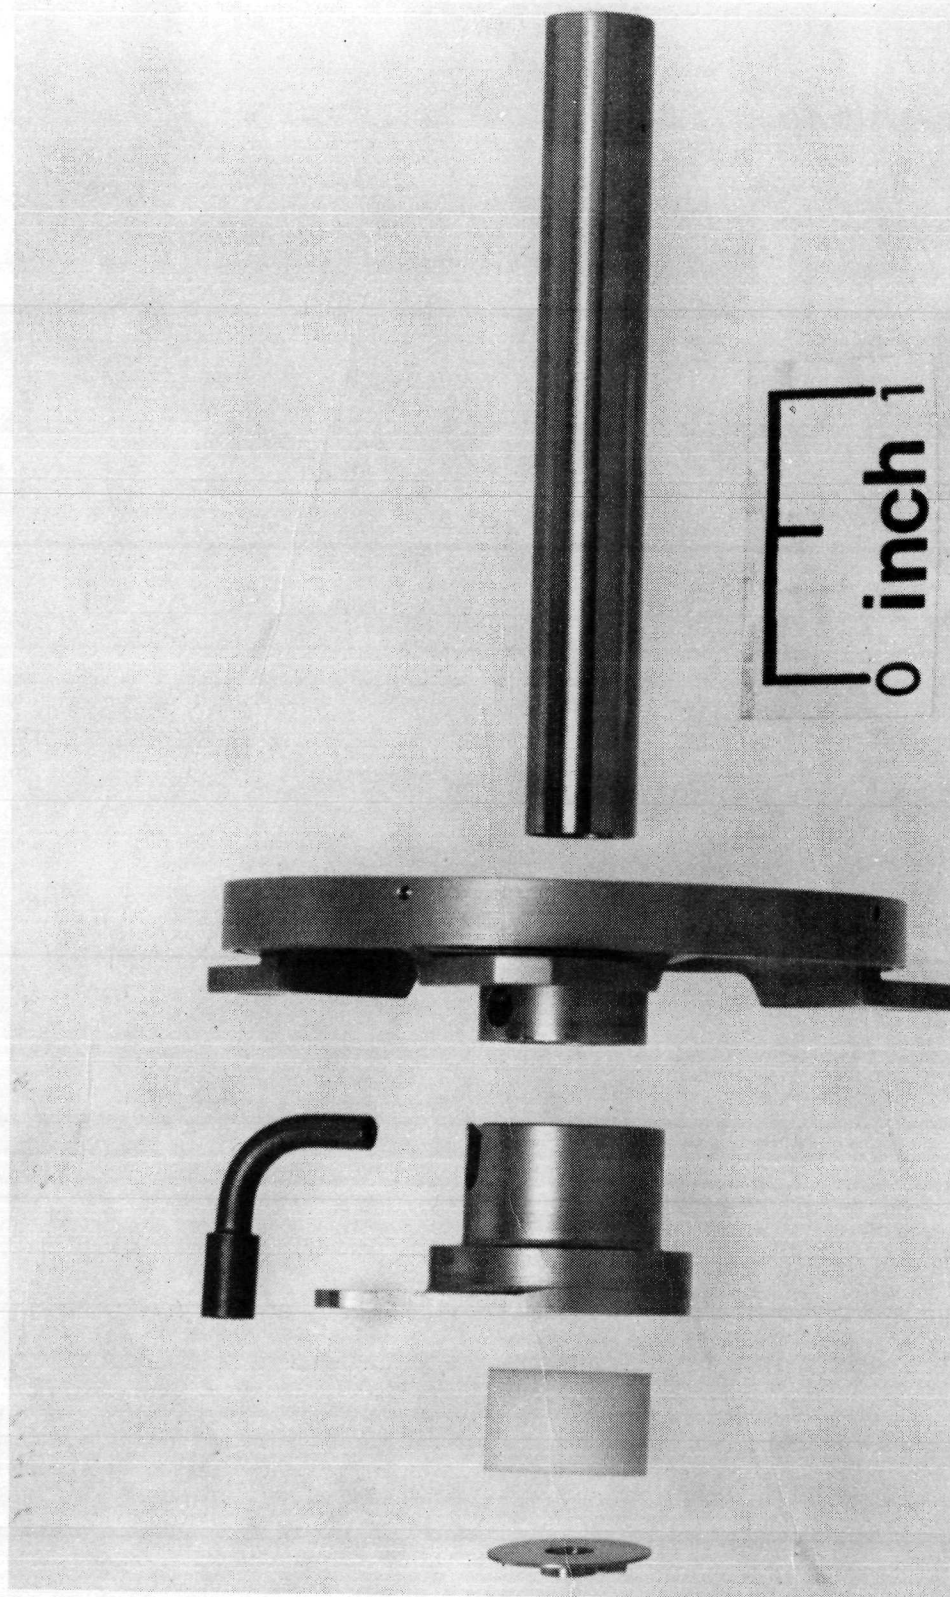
EXPLODED ASSEMBLY OF S/N 003 RUGGEDIZED RESISTOJET 21
